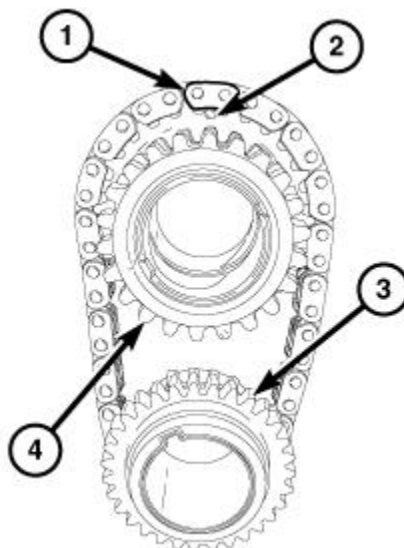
Placing Idler Sprocket Into Timing Chain So That Dimple Is Aligned With Plated Link On Timing Chain
